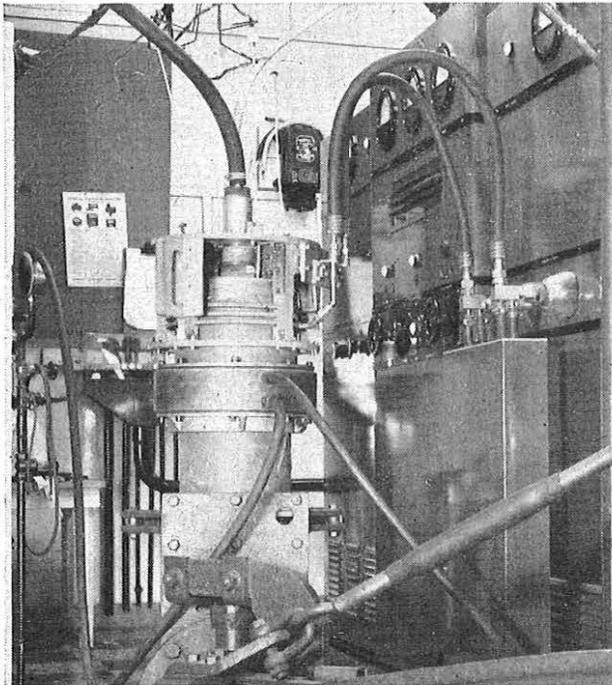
SILVER-SOLDERING OF BULKHEAD INTO HOUSING, USING AN INDUCTION HEATER.
